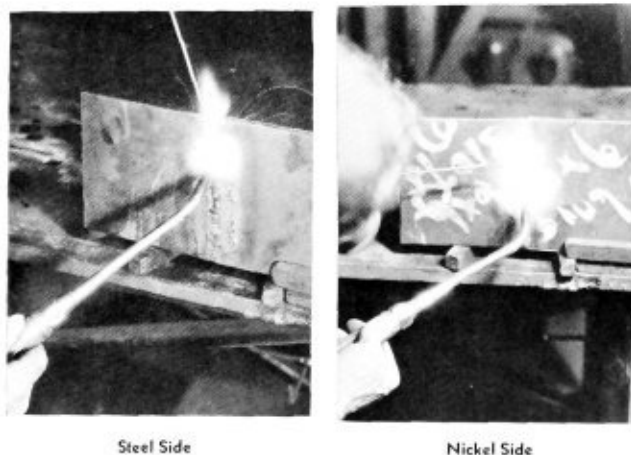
Acetylene welding a vertical seam, showing the proper position of the torch and weld rod
